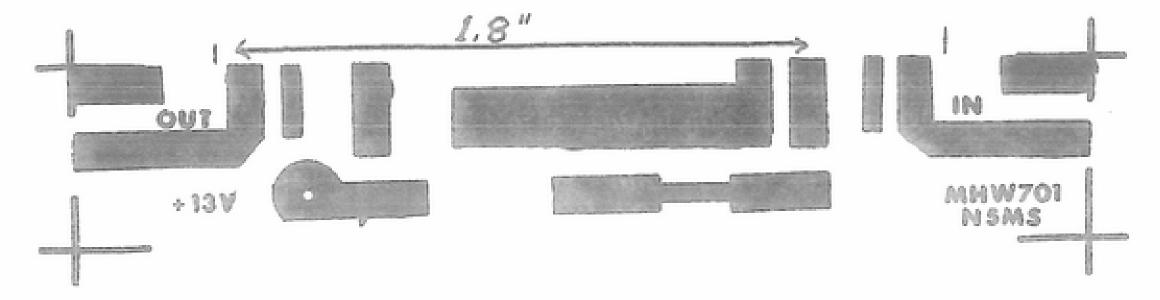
PC Layout for "Channel" type heat sink. Parts will be pretty tight for space, with a little judicious work, you should be able to fit them in.
